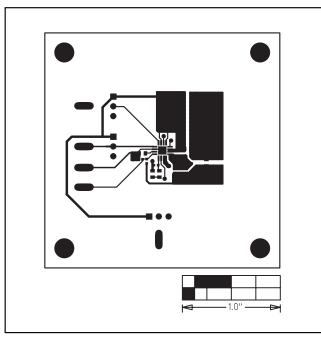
MAX8506 EV Kit PC Board Layout—Component Side
